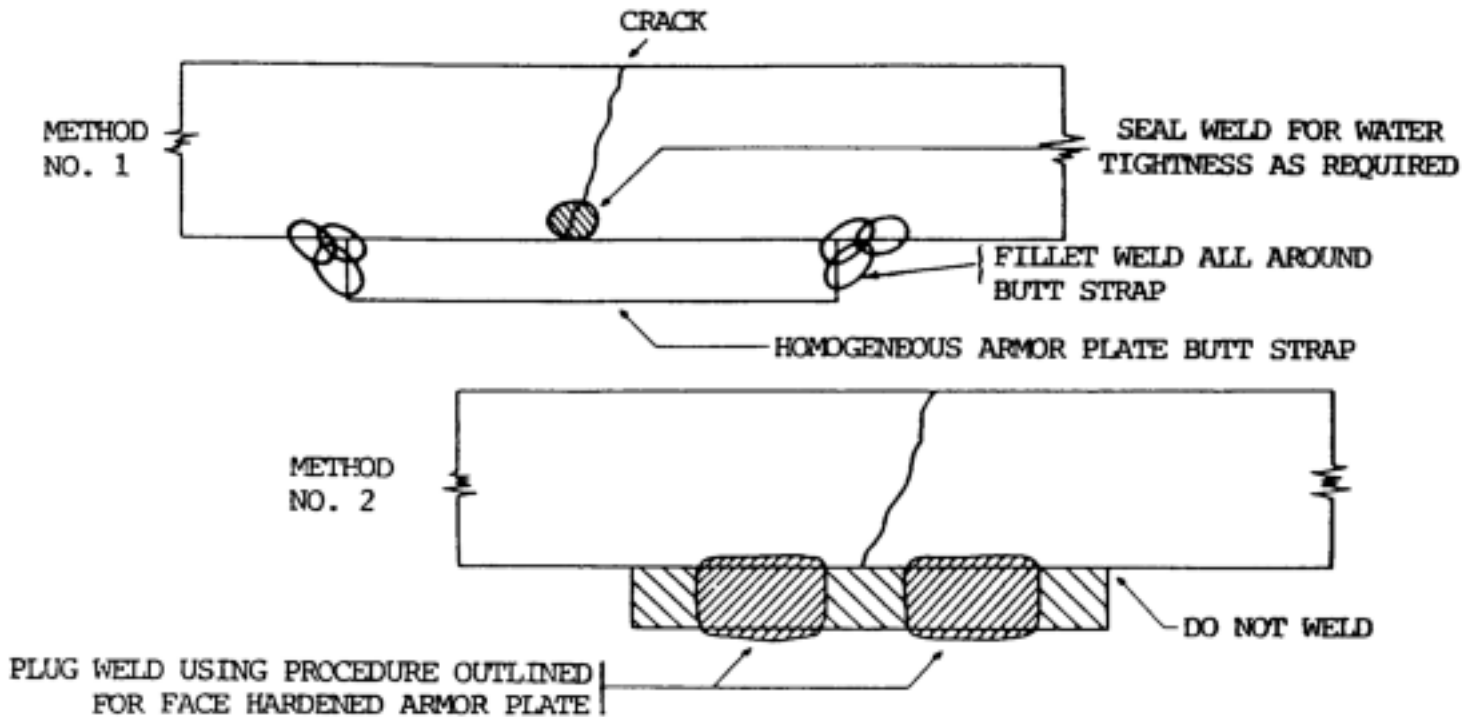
Butt strap welds on cracked armor plate.
